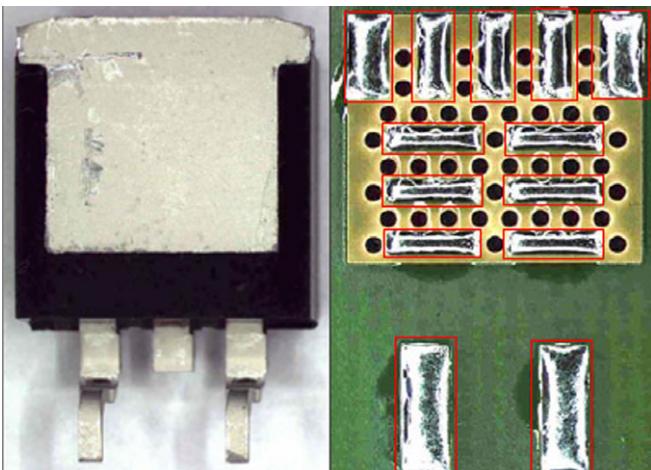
Left: heat sink of TO263; Right: solder pad layout of TO263.
